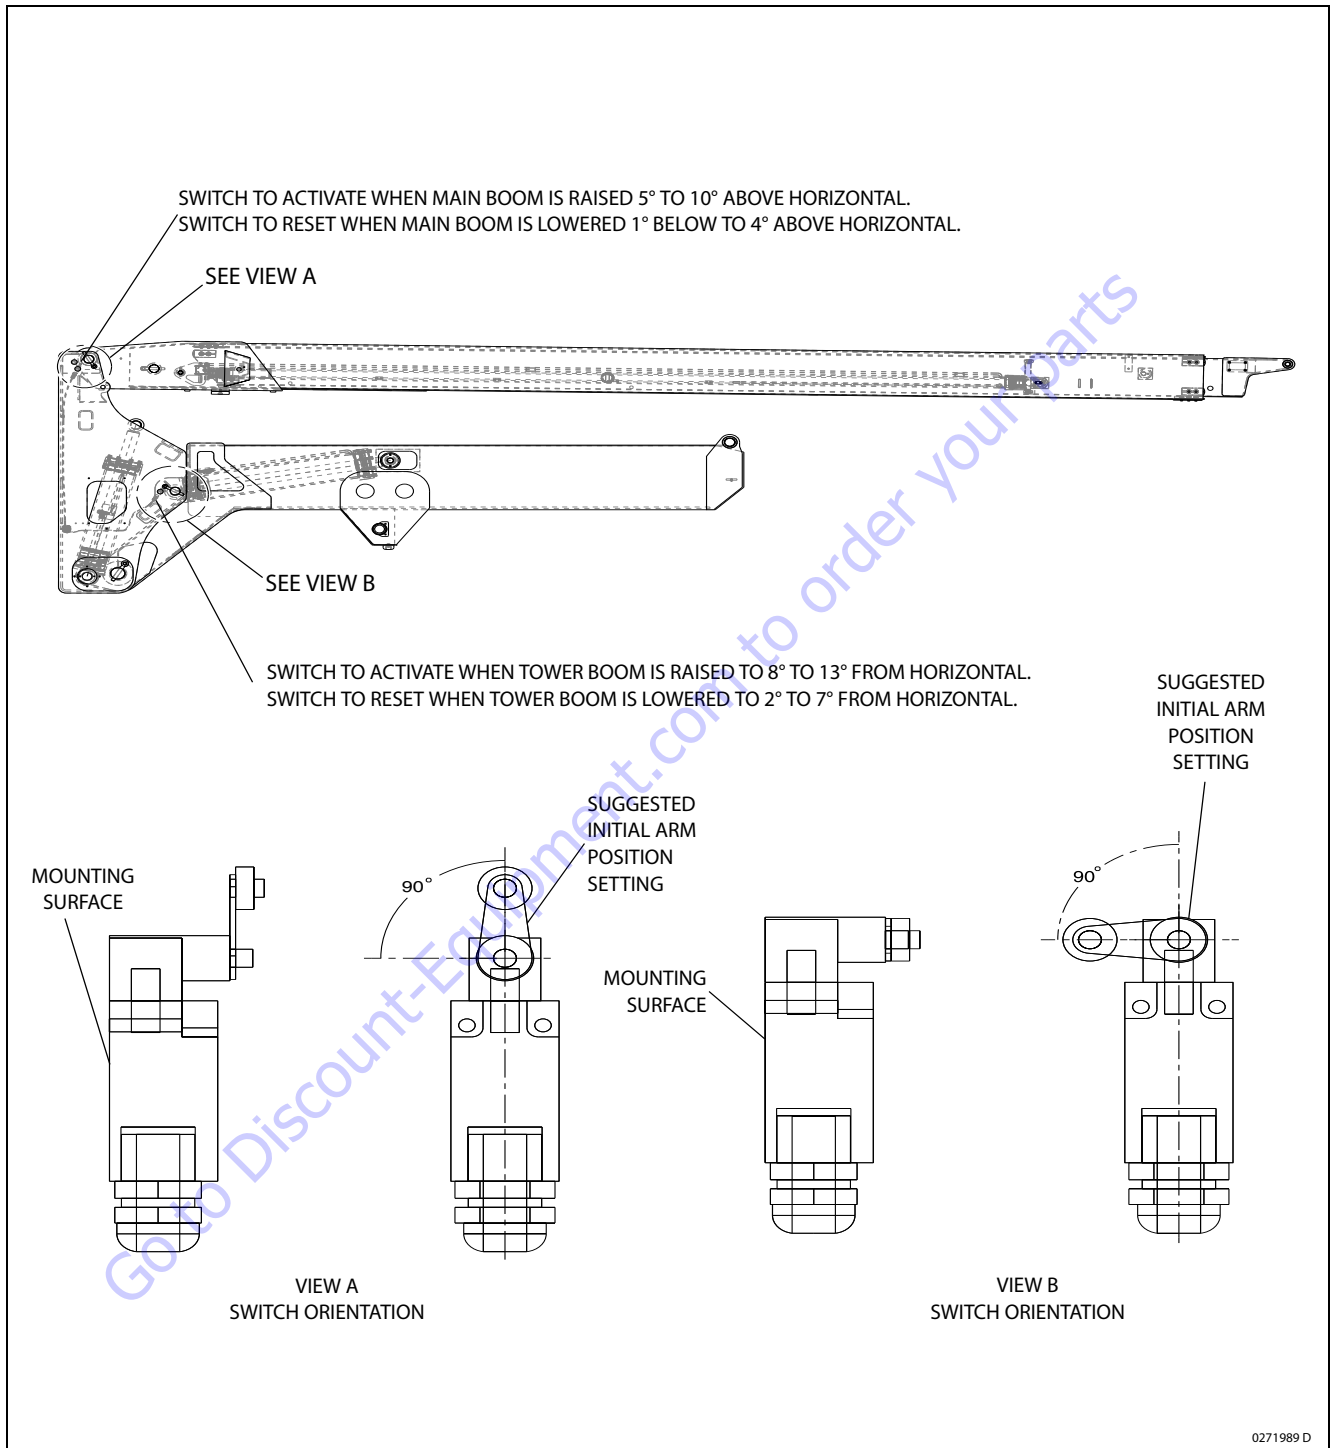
Boom Valve and Limit Switches Location (Sheet 1 of 2)
